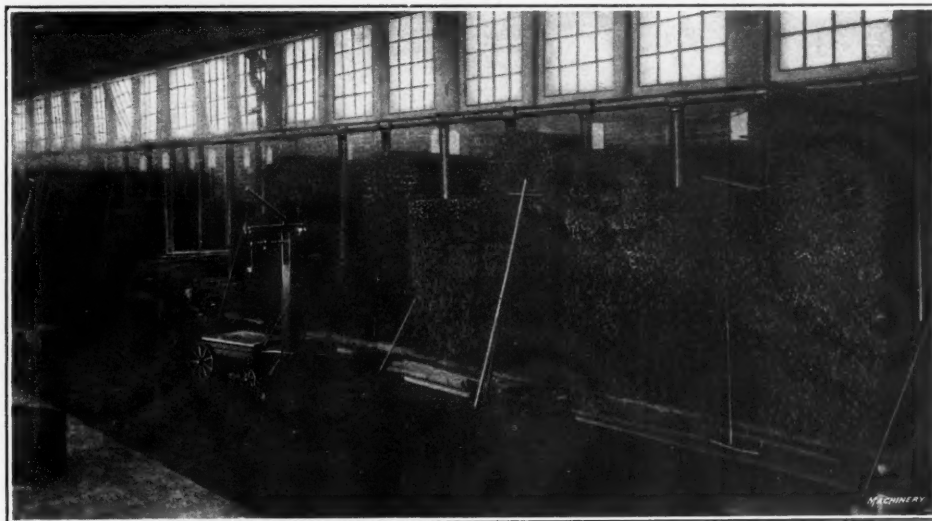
View of Stock Racks in Hot-forging Department where Ball Blanks exceeding  $\frac{3}{8}$  Inch Diameter are made
